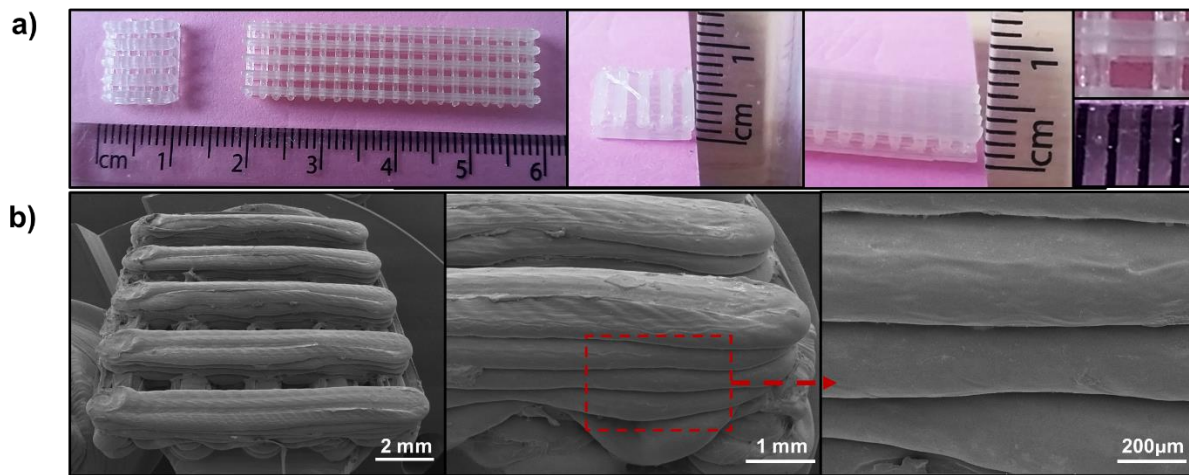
Structure of parts as printed and illustrative dimensions. a) Photograph of printed PLLA parts, with dimensions illustrated by a ruler. From left to right: parts top view, square and bar from front view (z), and pore (distance between ruler lines is 1 mm). b) SEM of scaffolds after printed. From left to right: Overview of the scaffold, side view of the part to observe layer deposition and, zoomed set of layers exemplifying the adherence and dimension of deposited beams.
